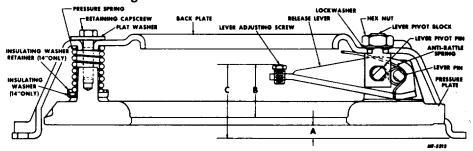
Sectional View-- 13", 14" RTA Clutch
